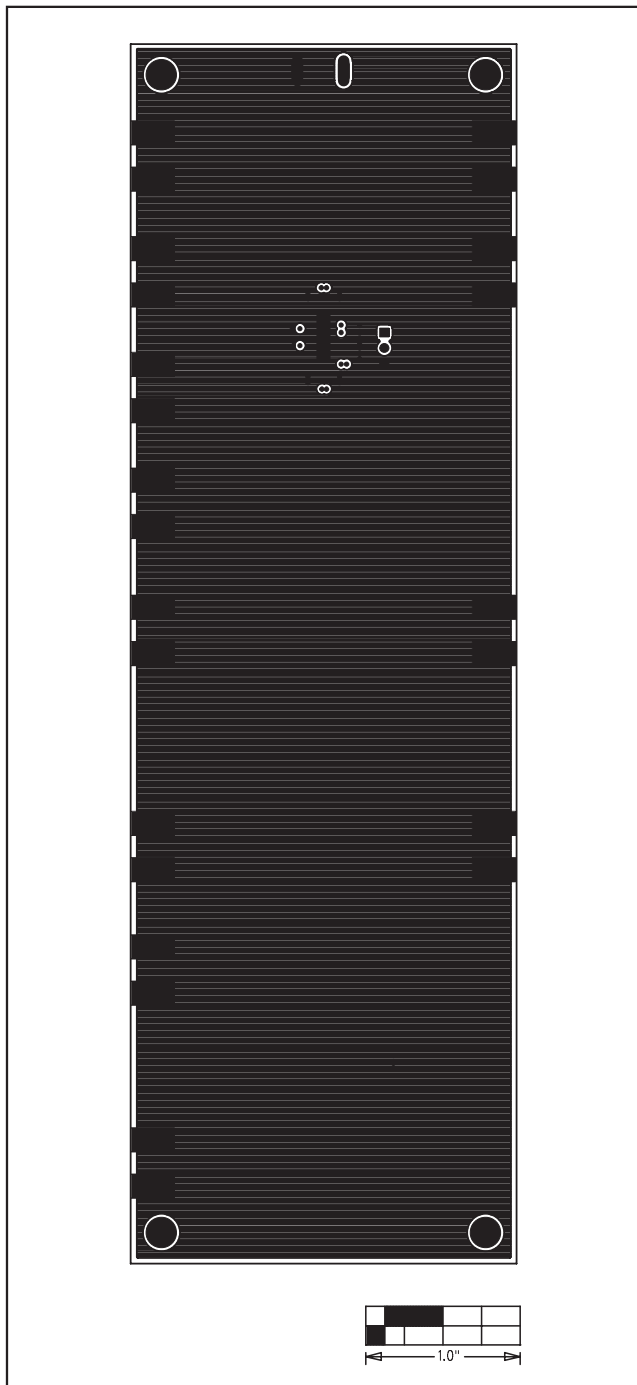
MAX4889B EV Kit PCB Layout—Solder Side
